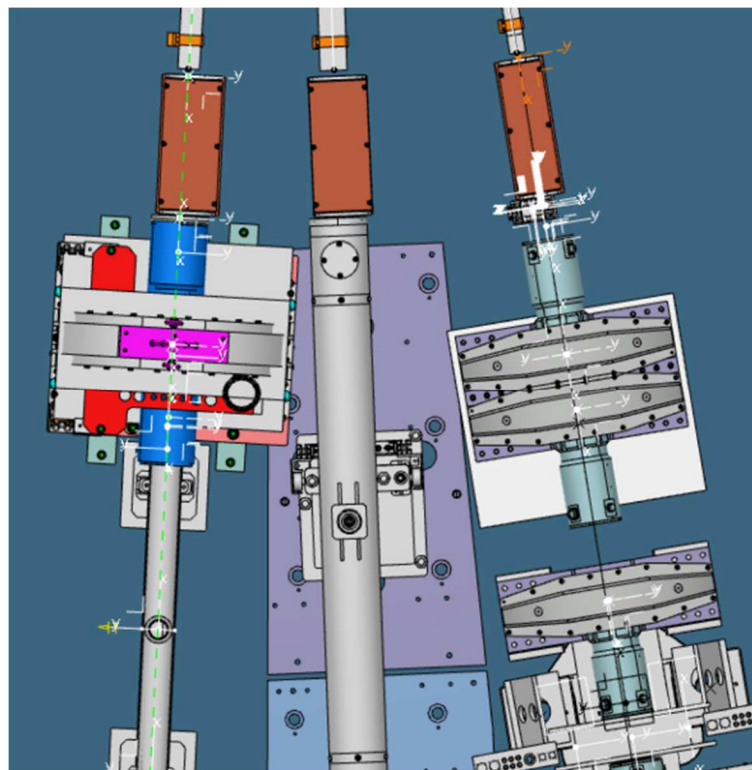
CAD view of BIFROST, CSPEC and BEER (from left to right) in the remote handling region.
